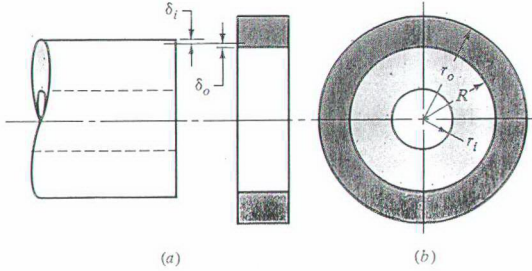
Notation for press and shrink fits. a- Unassembled circular cylinder with a hole parts b- after assembly
